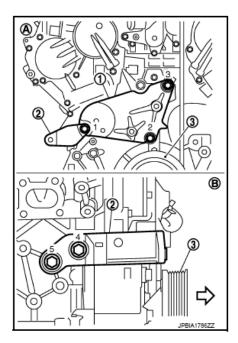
Power Steering Oil Pump Bracket And Idler Pulley Bracket Bolts Tightening Sequence
